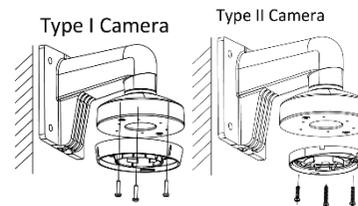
Install the Mounting Base to the Pendant Bracket
